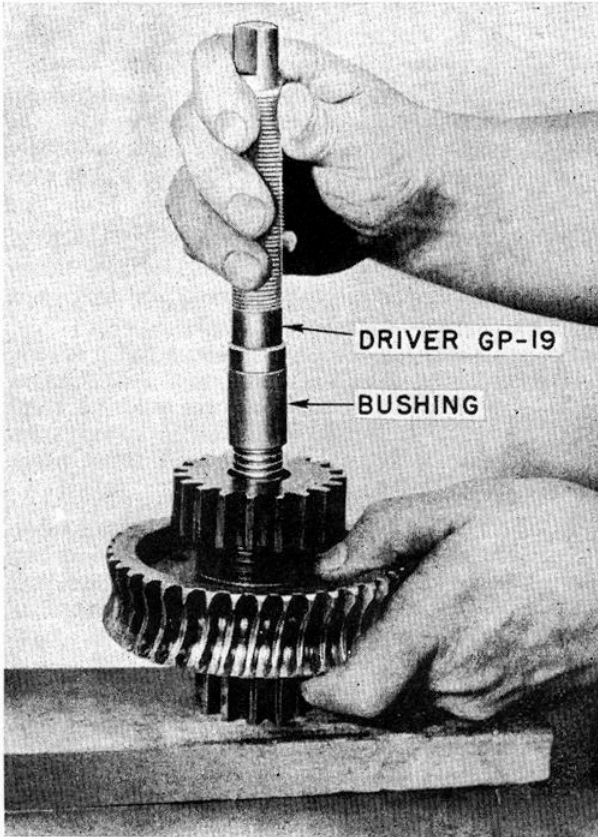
INSTALLING TRANSMISSION PINION BUSHING
